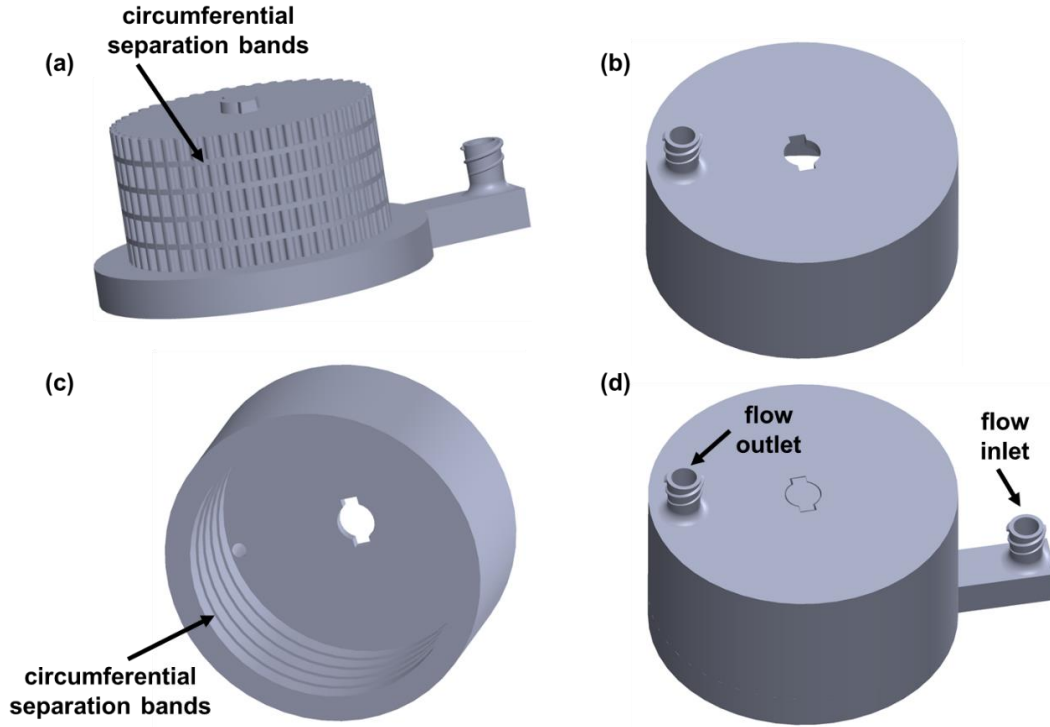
(a) Part A of the five-belt mold, (b) top view of part B of the five-belt mold, (c) bottom view of part B of the five-belt mold, and (d) assembled view of parts A and B.
